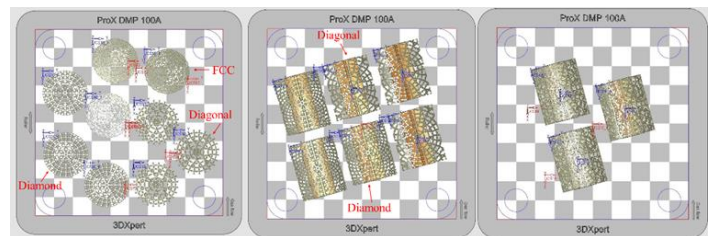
Building plates design in 3DXpert. The direction of the roller is up-down.
